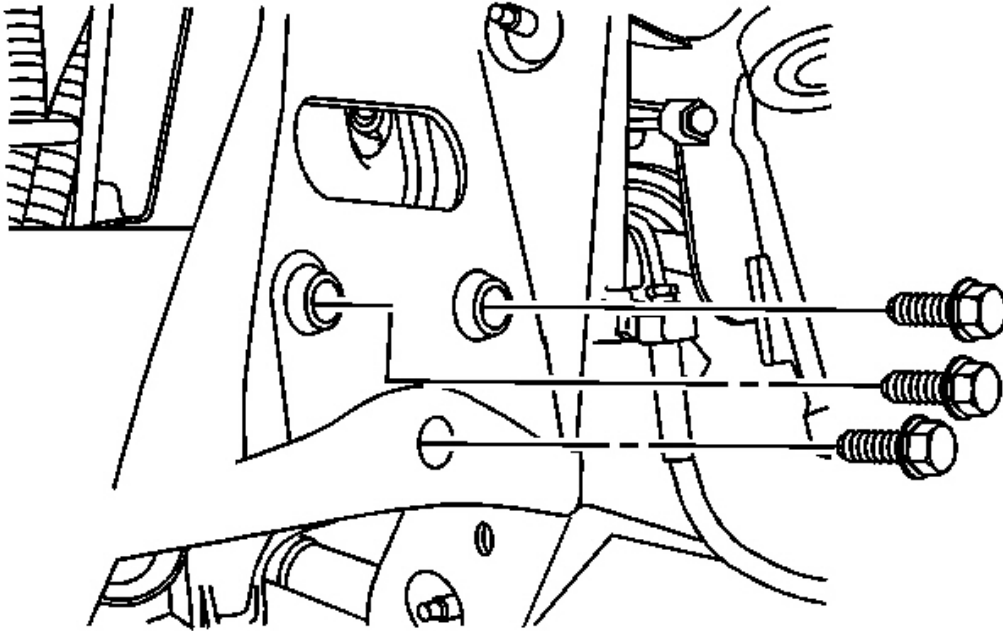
View Of Frame Engine Mount Bracket Bolt Locations
